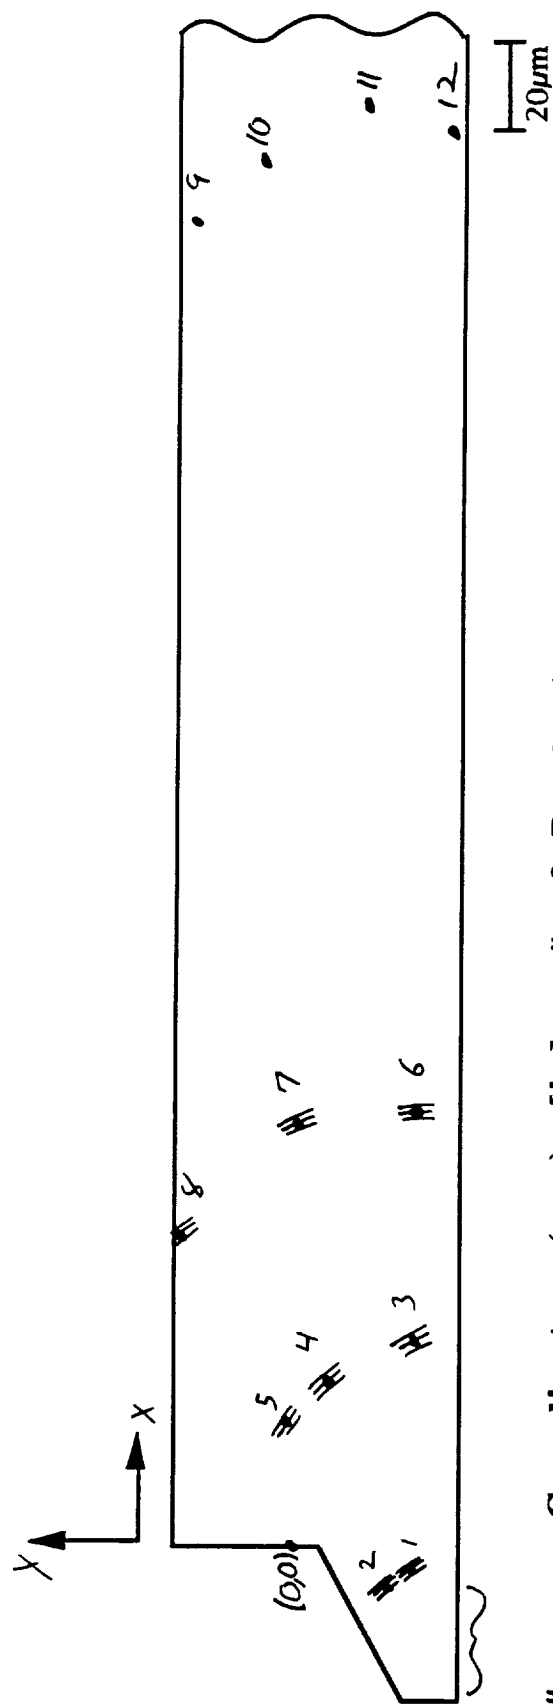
Rivet hole schematic: Upper rivet row, hole number 4J15, fatigue crack growth is in the forward direction.
